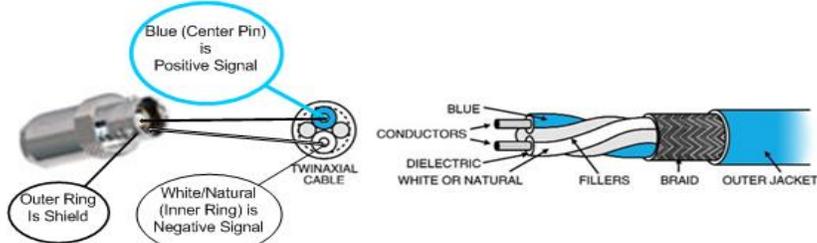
Optional ENETCAB-1553-J1-02 Cable Assembly
